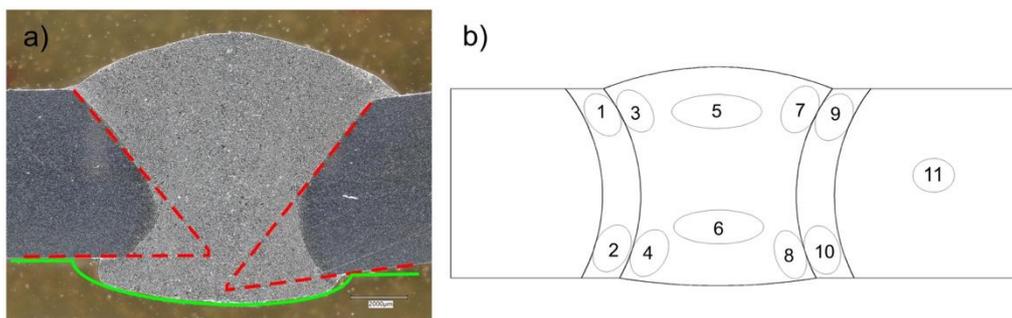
a) Welded joint of Al 6082-T6 alloy with the outline of the edges of the joined elements (the red) and the washer forming the root (the green); b) the hardness measurement points
